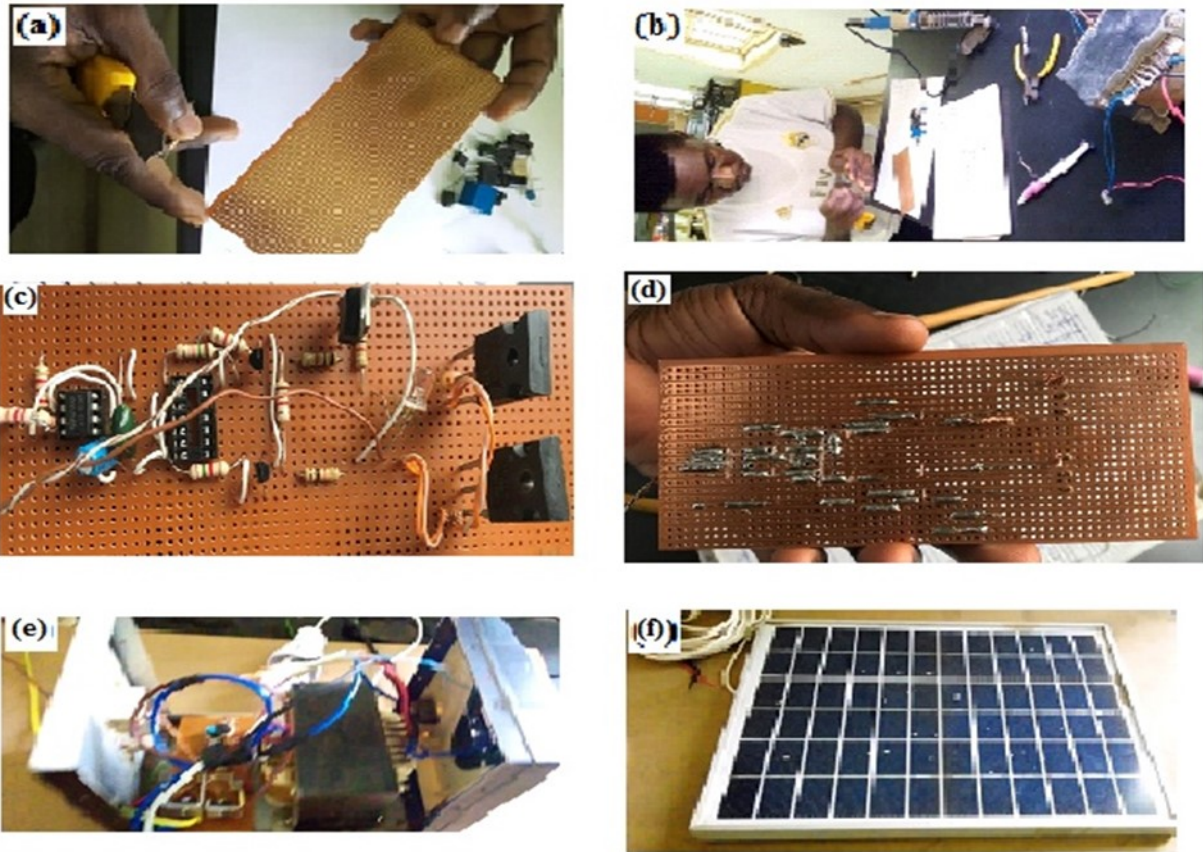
(a) The Vero board and some electrical components (b) Setting stage for soldering (c) Front view of soldered components on the Vero board (d) Back view of soldered components on the Vero board (e) Internal Components of Inverter (f) Solar panel for harnessing solar energy as an alternative to an electrical source.
